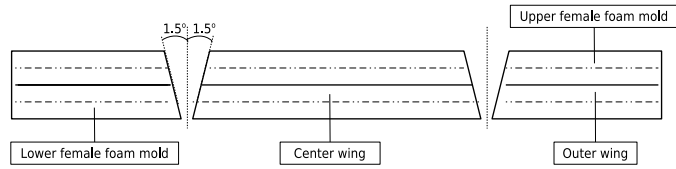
Adjustment of the dihedral angle in the male-female foam mold assembly.
